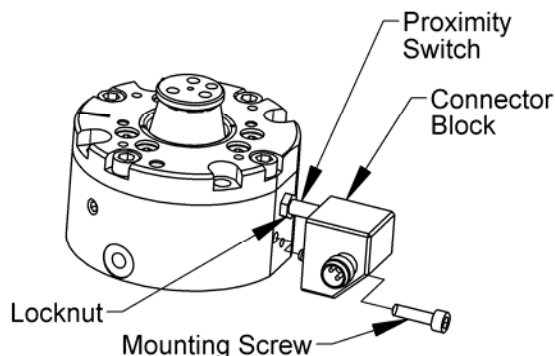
Removal of Switch/Connector Block Assembly from the Protector™
